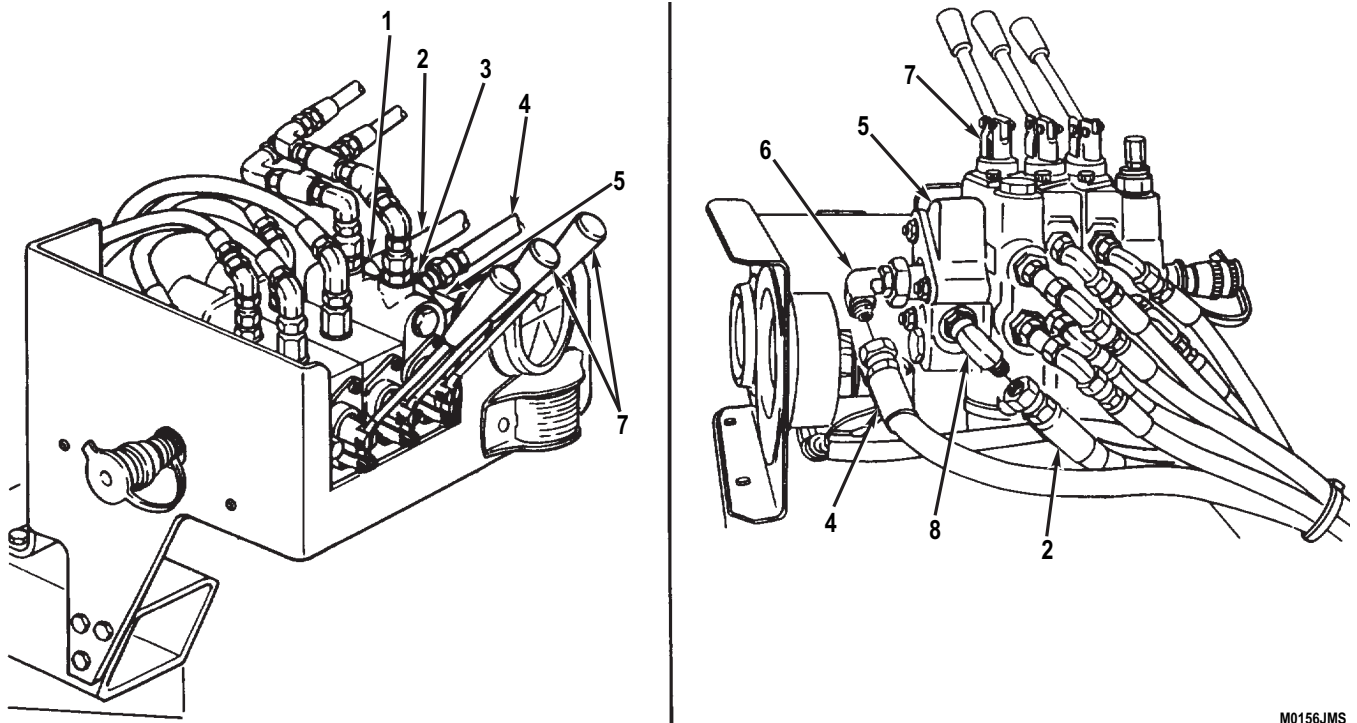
Hydraulic Pump Outlet-to-Hydraulic Control Valve Inlet Hose Connection.
